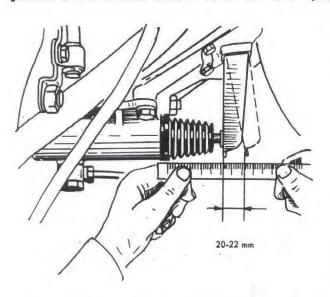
CHECKING OF CLUTCH RELEASE CYLINDER PISTON STROKE
